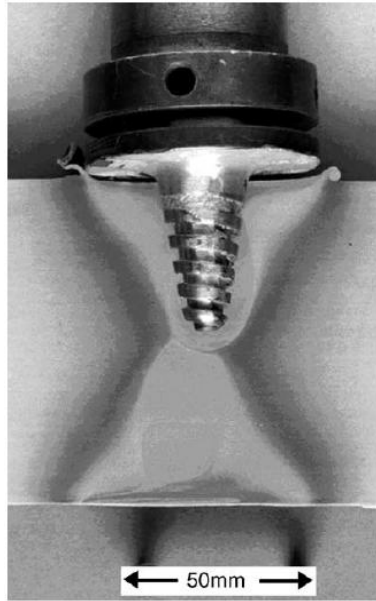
Threaded tool pin shaped as a frustum. Whorl™ [7].
